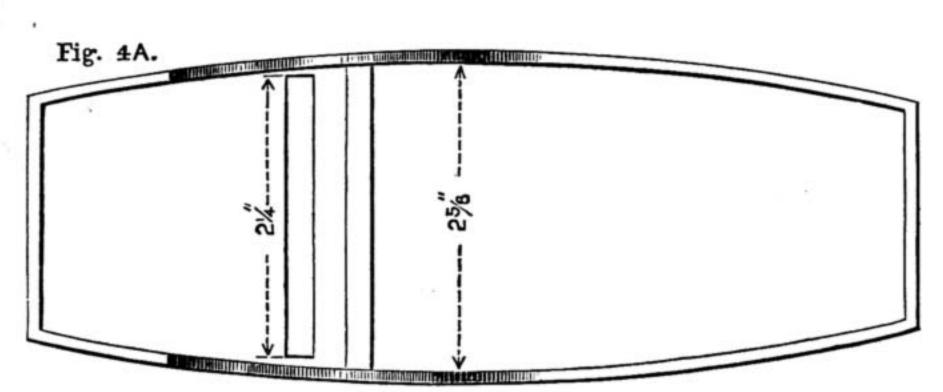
Casting for Iron Smoothing Plane: Section. Fig. 4 A.—Ditto: Plan.
